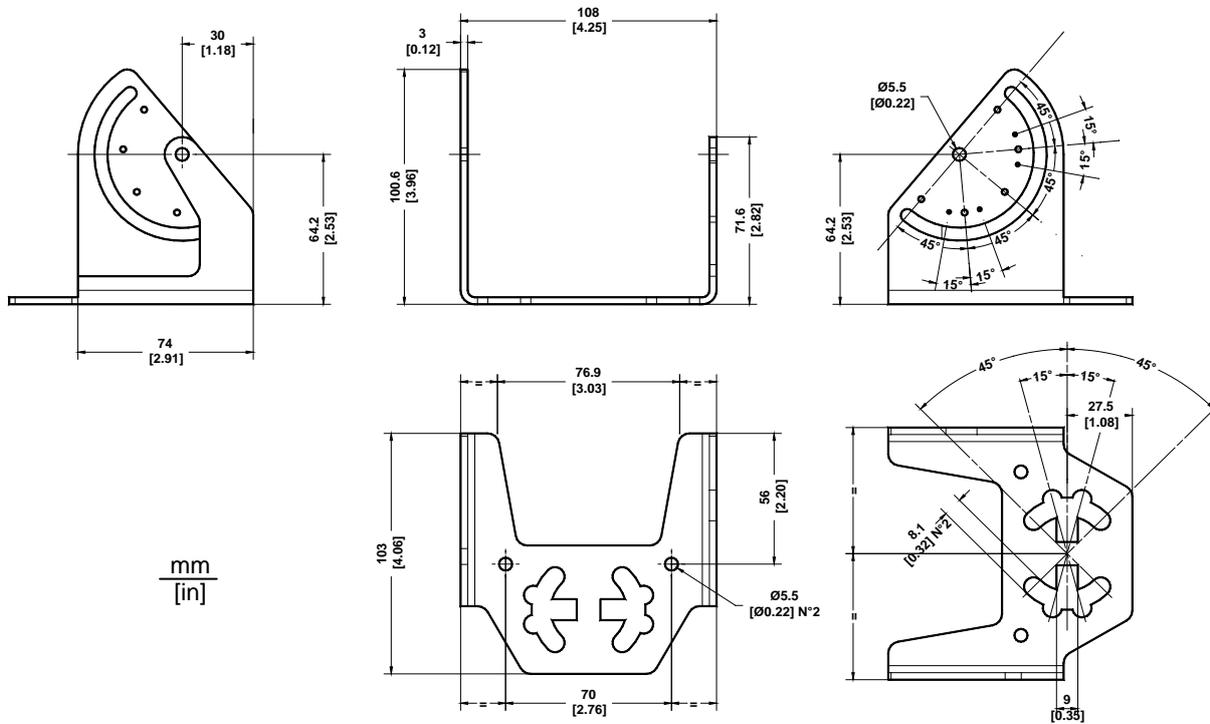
U Shape Mounting Bracket Overall Dimensions
